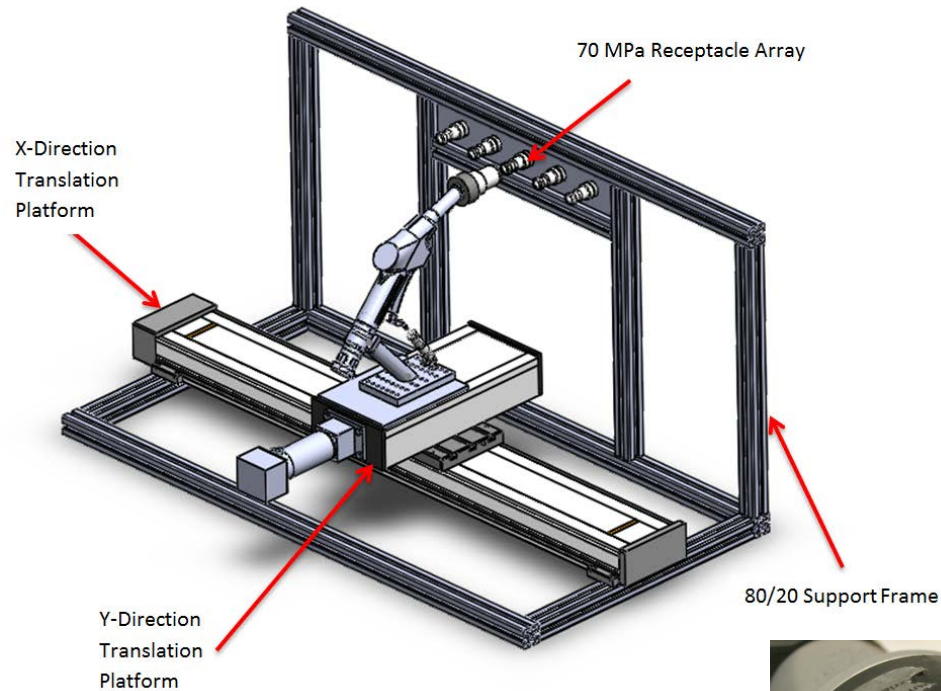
Nozzle/Receptacle Mechanical Testing Platform
